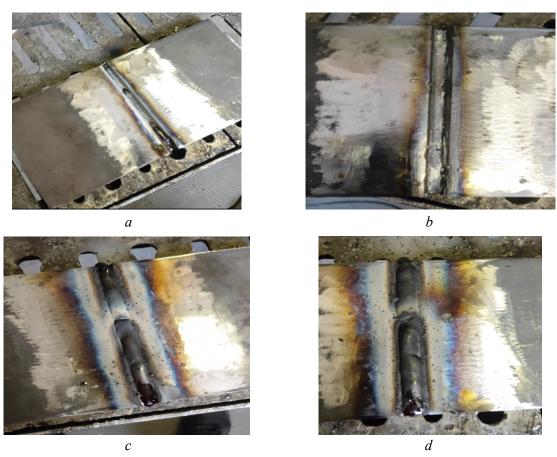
Appearance of the welded seam after filling with TMU-21U electrodes: a – the root of the seam; b – the root of the seam after stripping with a machine; c – the filling seam; d – the facing seam
